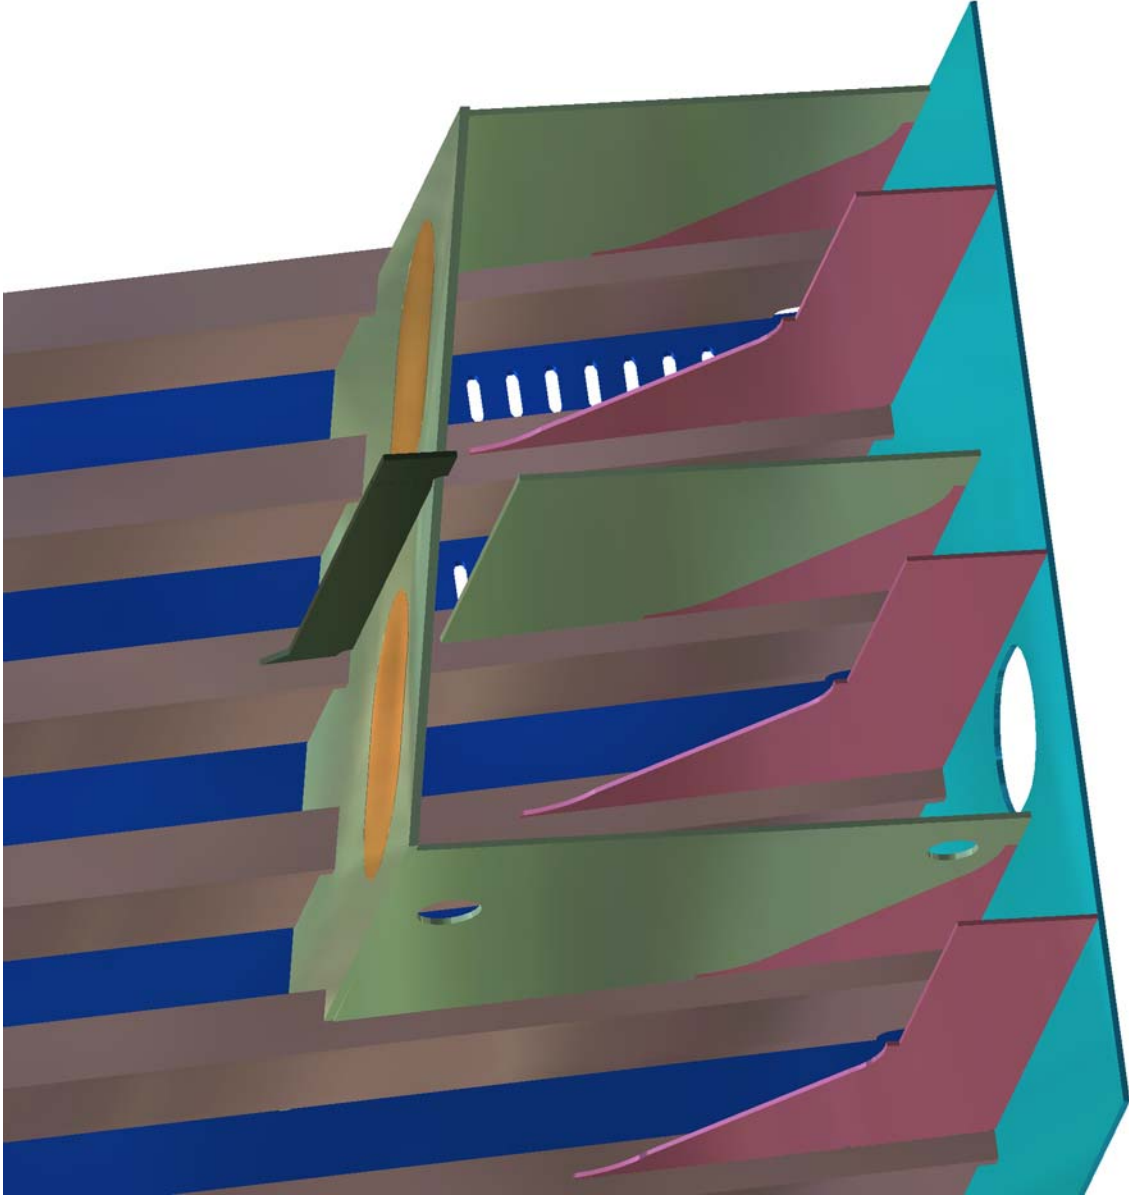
Seachest Looking Outboard and Forward with Inboard Plate Removed
